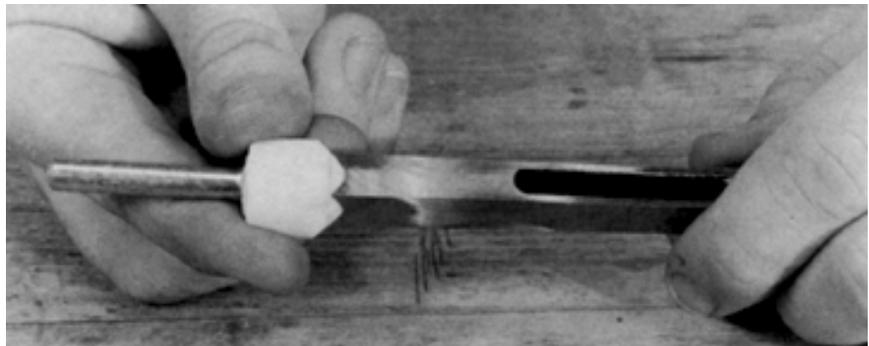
Use the cone-shaped grinding stone to remove the internal burr.
